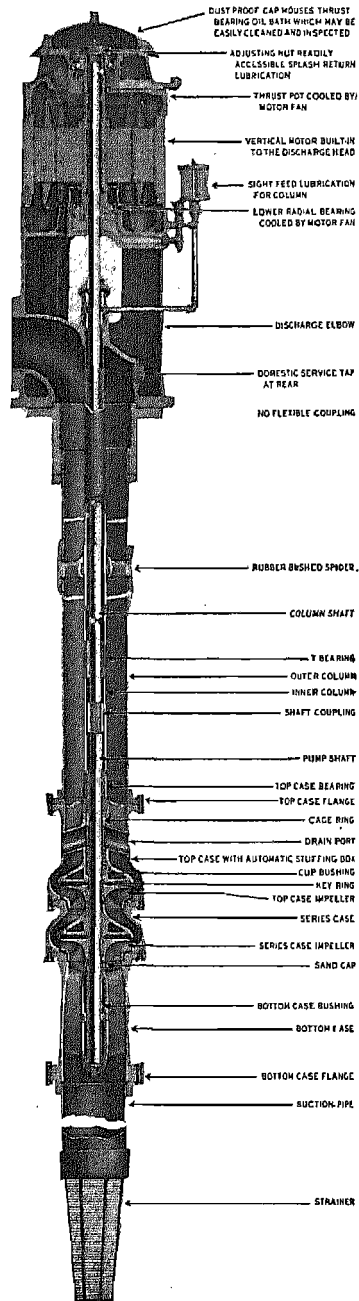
Cutaway section of two-stage Byron Jackson deep-well turbine pump and motor showing details of parts. (Courtesy Byron Jackson Company.)
